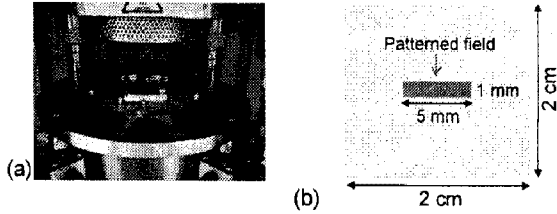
(a) Photograph of hot-emboss system (b) Schematic of mold design
